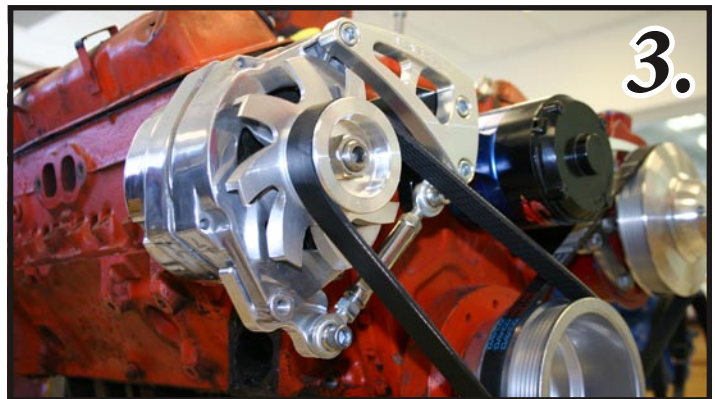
Install the Relocator Bracket to the Alternator (20142-A) using (1) $\frac{5}{16}$ - 18 x $\frac{7}{8}$ " Socket Caps Screw (S144). Install the Stainless Steel Adjustment Rod (RA-2.500) to the Relocation Bracket and lower bolt hole of the Alternator Adapter. Using (2) $\frac{3}{8}$ - 16 x 1" Socket Caps Screws (S248).
